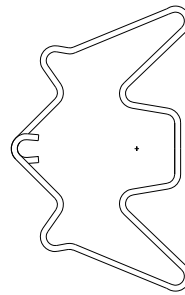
Heater Assembly: Model Linear 40-S20 and 60-S20.
